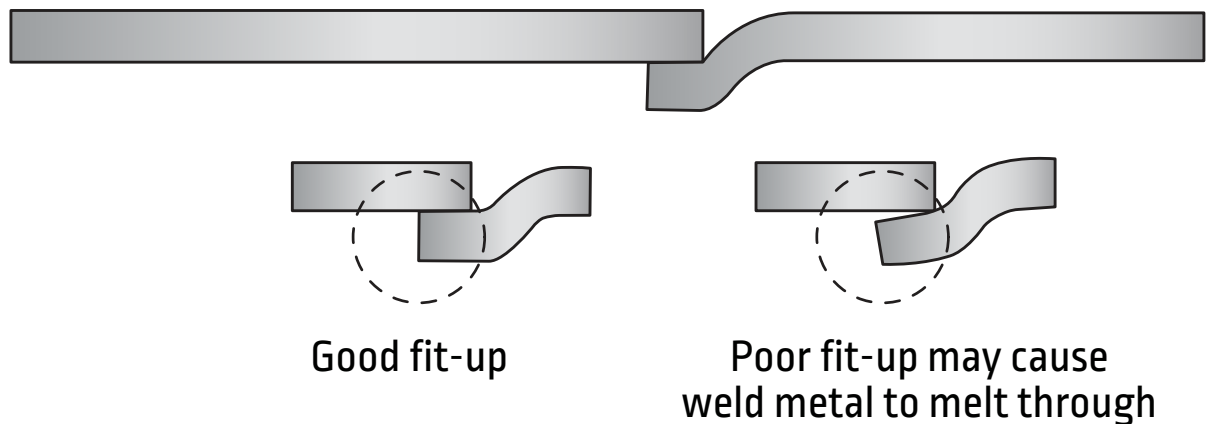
Top, Typical Joggle Joint. Bottom Left, Good Fit-up. Bottom Right, Poor Fit-up.
